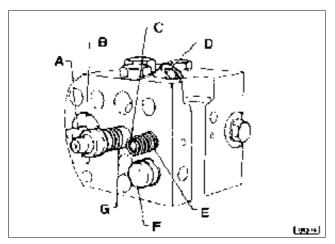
Hydraulic distributor case. A Nonreturn valve pushrod
